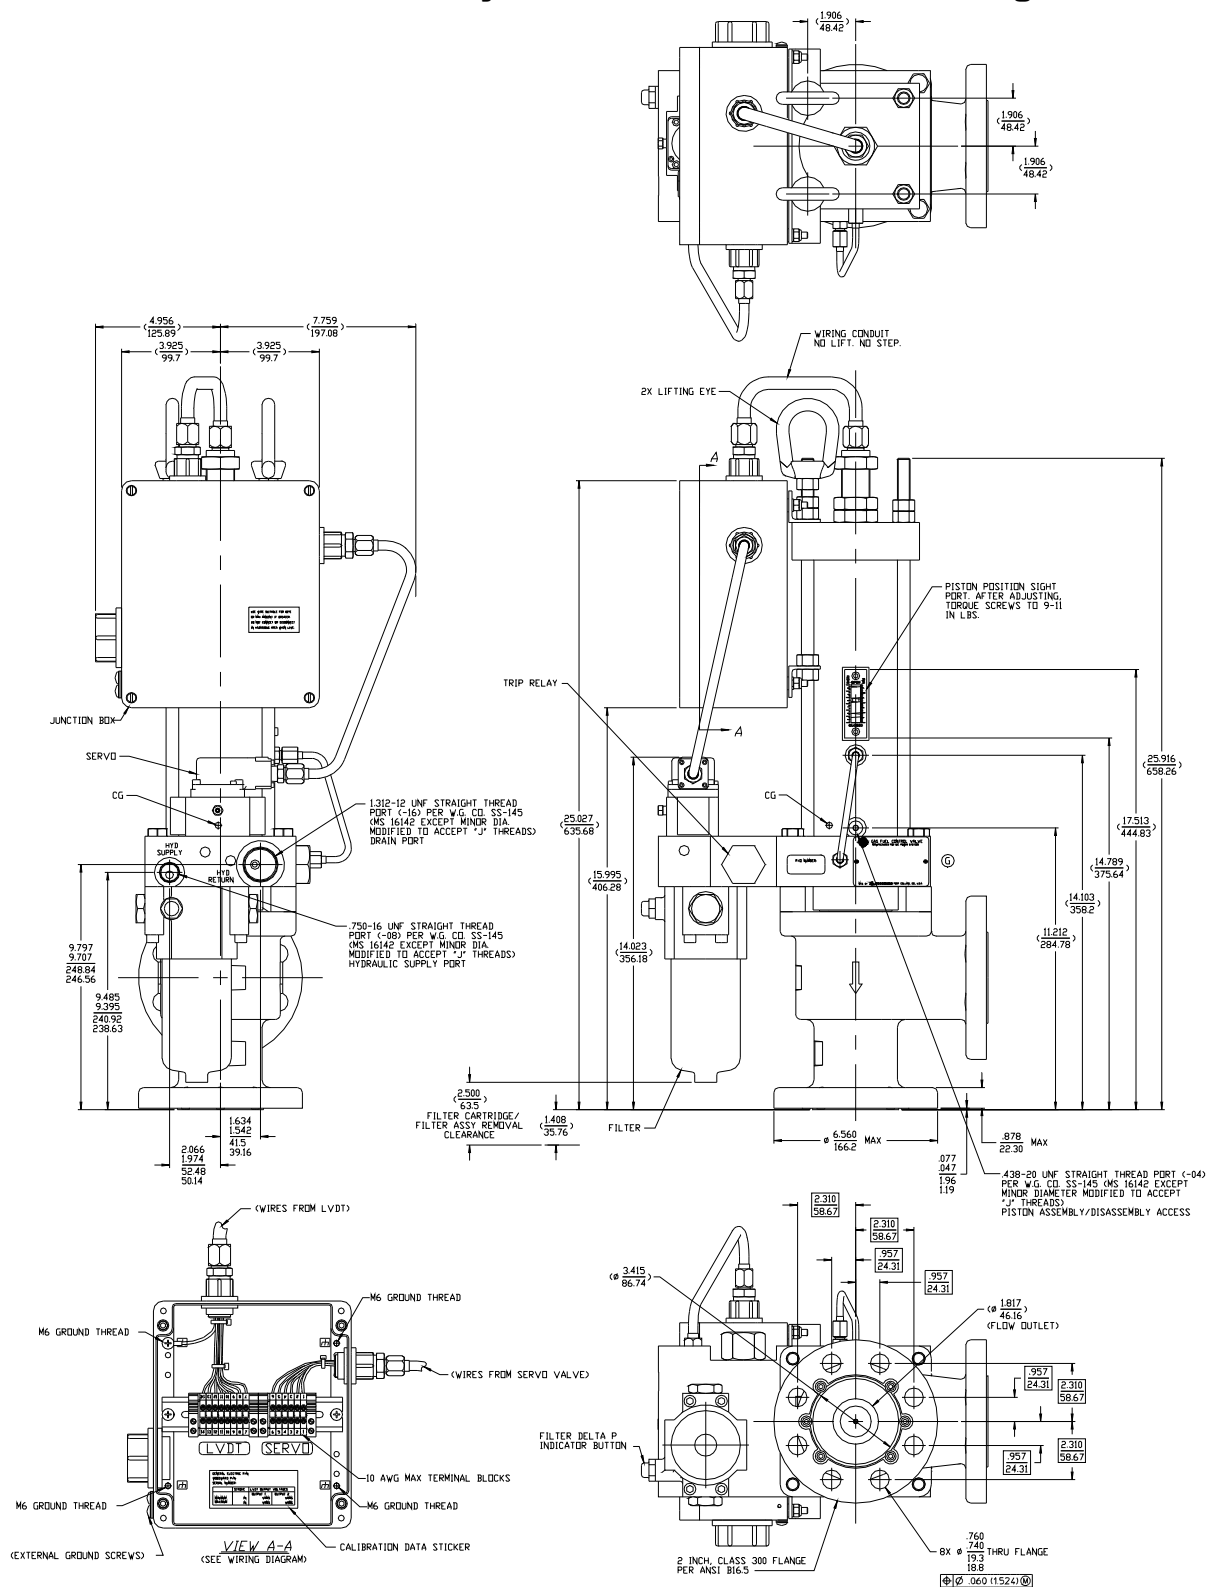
Outline Drawing 2" Standard Recovery Control Valve (View Showing Dual Coil LVDT)
